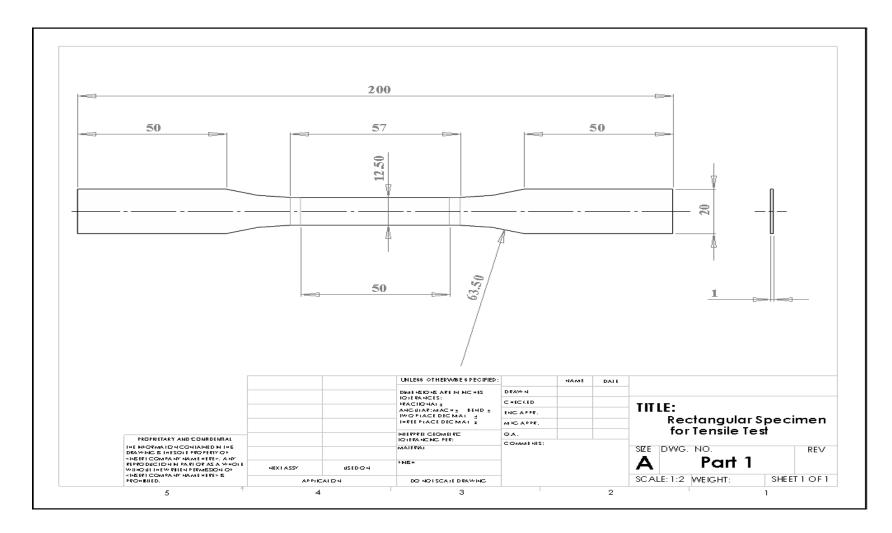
Sheet drawing of rectangular tensile test specimen
